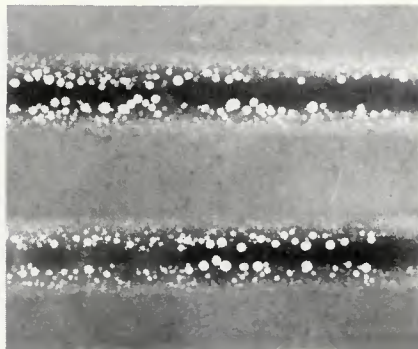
Radiography of two-pass weld in H/DH compact (2nd pass lower)
